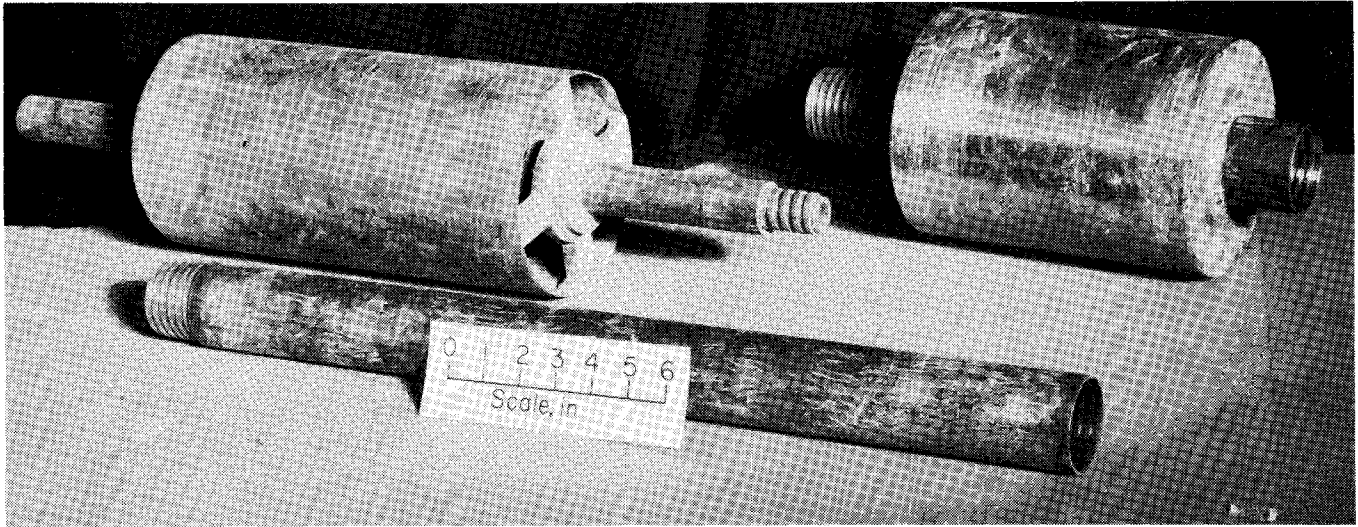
Stabilizer on 2-ft section of EW drill rod (upper left), stabilizer on 1-ft section of BX wire line drill rod (upper right), and 2-ft piece of BX wire line drill rod (foreground).
